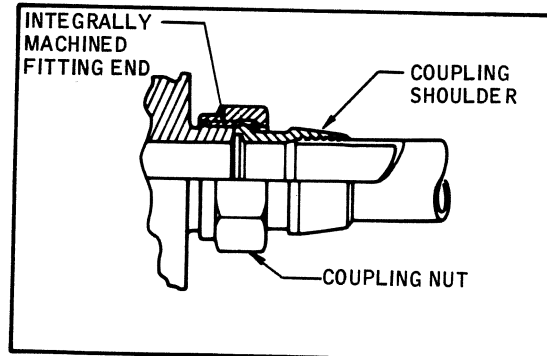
INTEGRALLY MACHINED CONNECTOR
